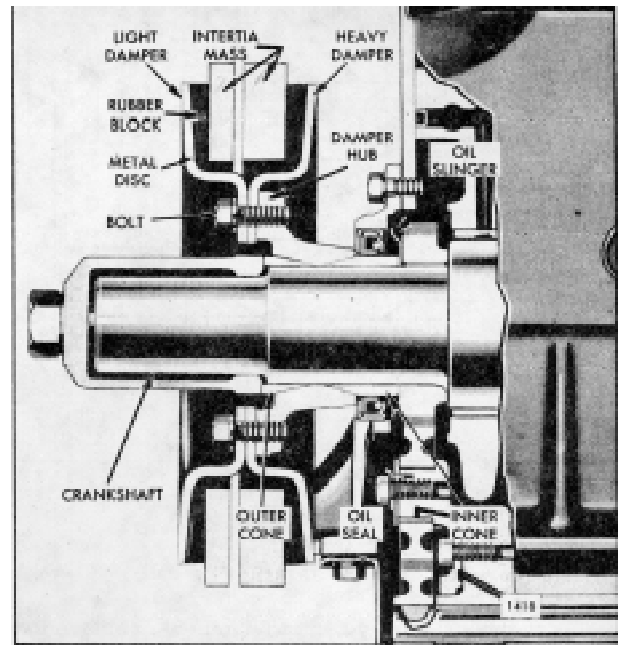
Crankshaft Cap and Double Vibration Damper Assembly and Mounting
